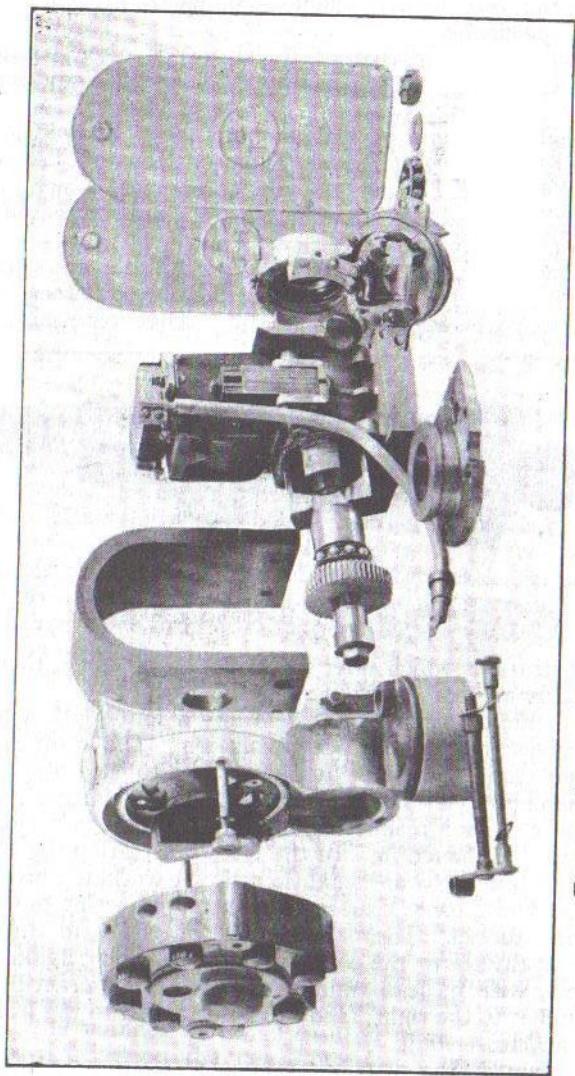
Dismantled Parts of a B.T.-H. 8-Cylinder Inductor Magneto.
